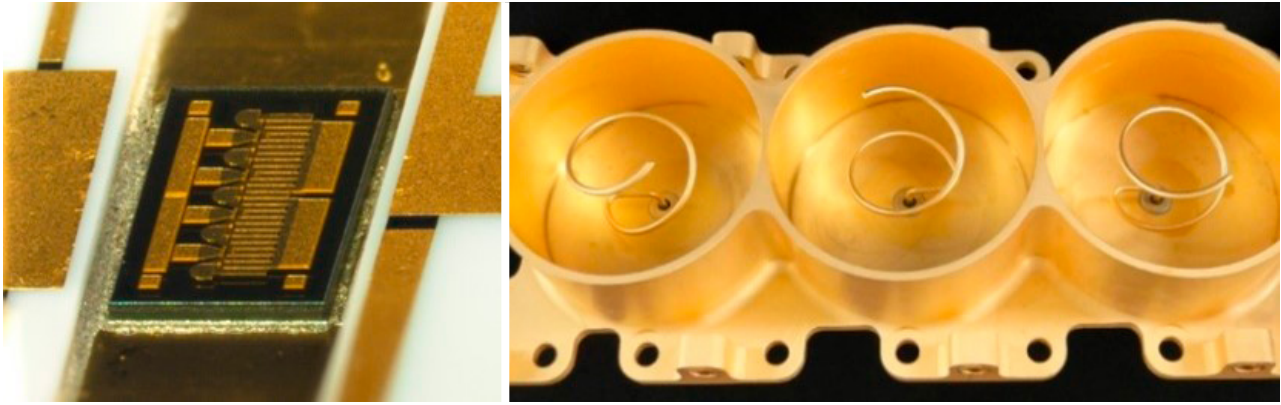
Eutectic die bonding examples. Left, a GaAs die eutectically mounted to a gold-plated copper-molybdenum-copper package using 80Au/20Sn solder preform for the IMAP mission. Right, hermetic feedthroughs eutectically mounted to gold-plated aluminum housing using 80Au/20Sn solder preform for the Europa Clipper fan beam antenna.
